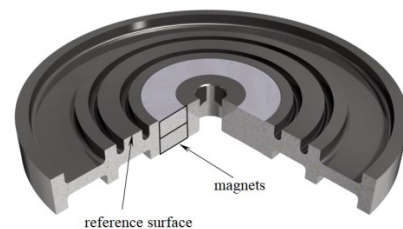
3D CAD model of the disc with magnets (three-quarters view).
